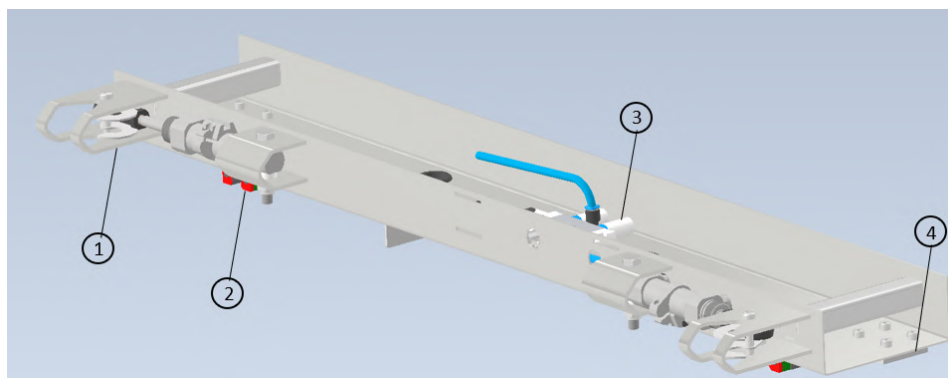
1) Grabbing mechanism, 2) HIWIN cart, 3) air solenoid valve, and 4) clamping plate
